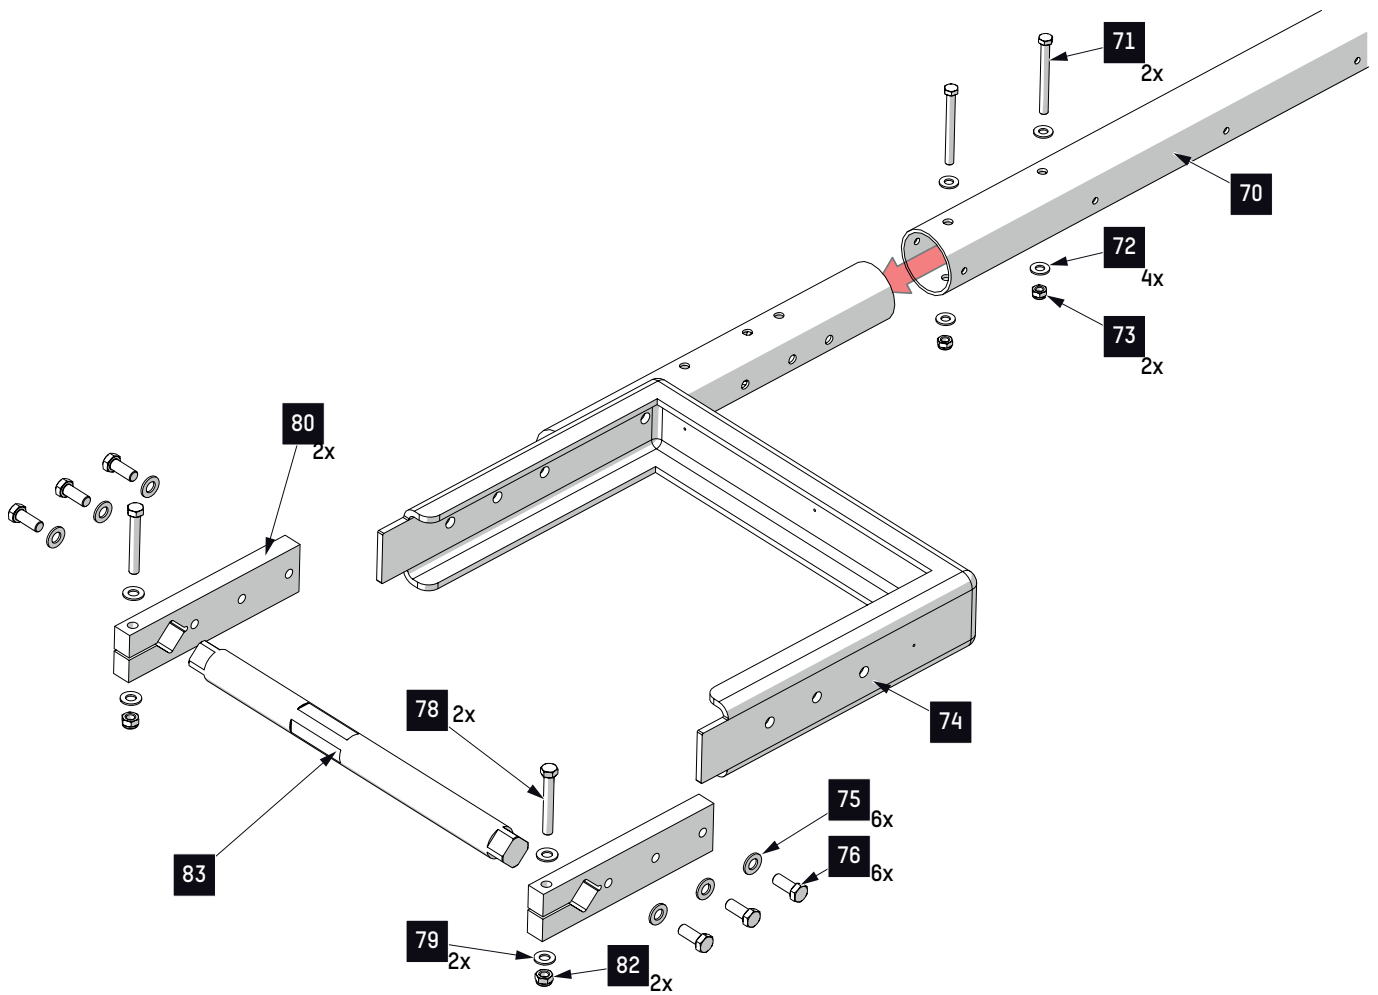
Assembly of the arm with folding fence BL46 - Exploded view
